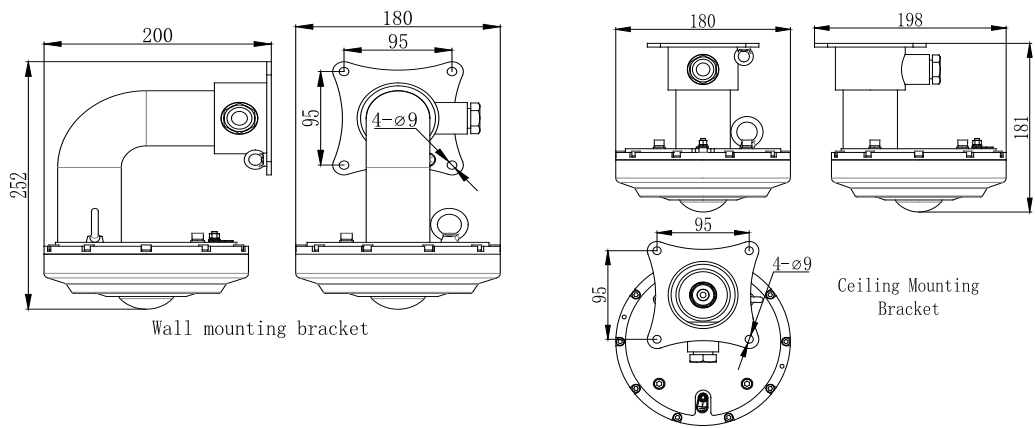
Dimensions of DC-□ Explosion-proof Camera
